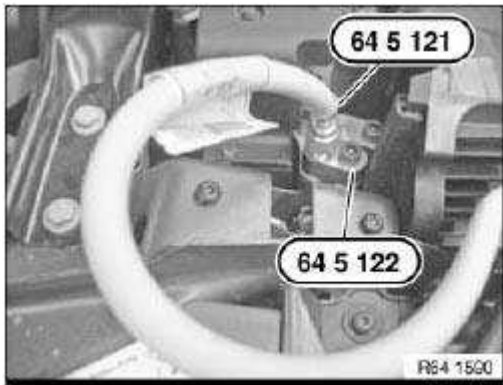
Identifying Special Tool 64 5 122 & 64 5 121
